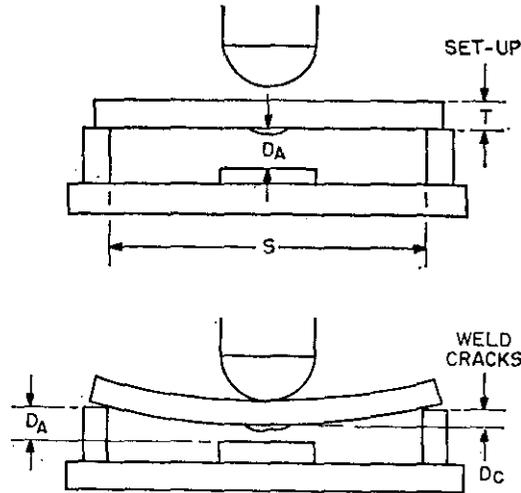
Method for Measuring Weld Metal Thickness at the Bottom of the Notch.
